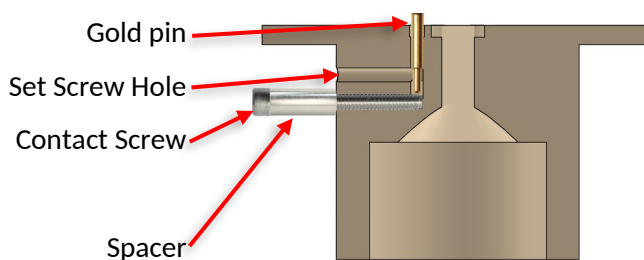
Cross section of JW, flipped upside down so that the gold pin doesn't fall out.
